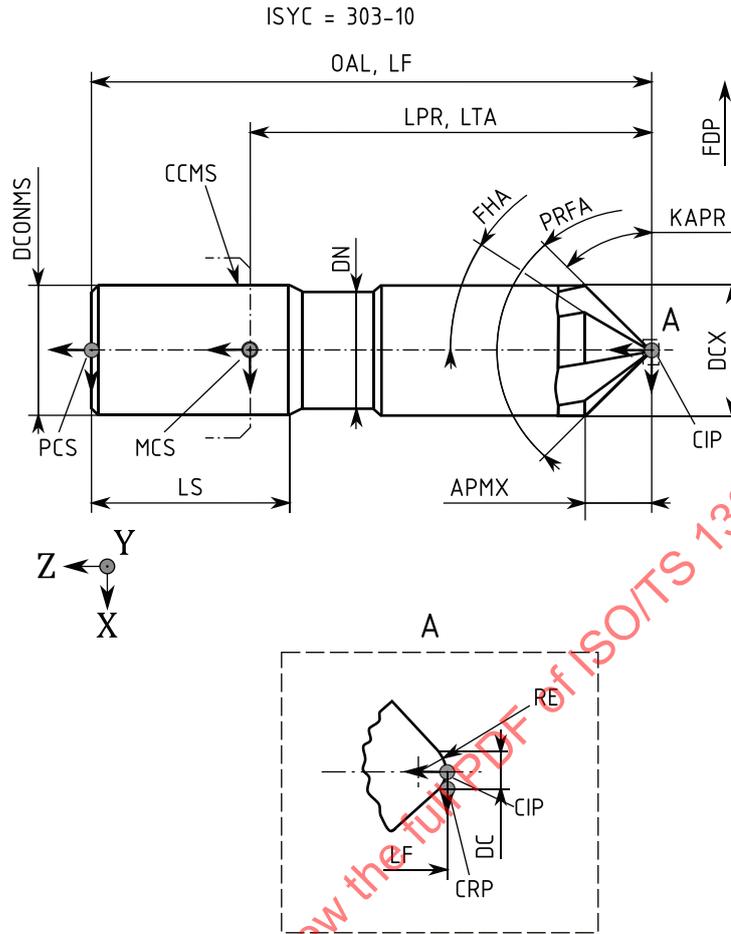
ISYC 303-10 - Cutting stylus, solid
